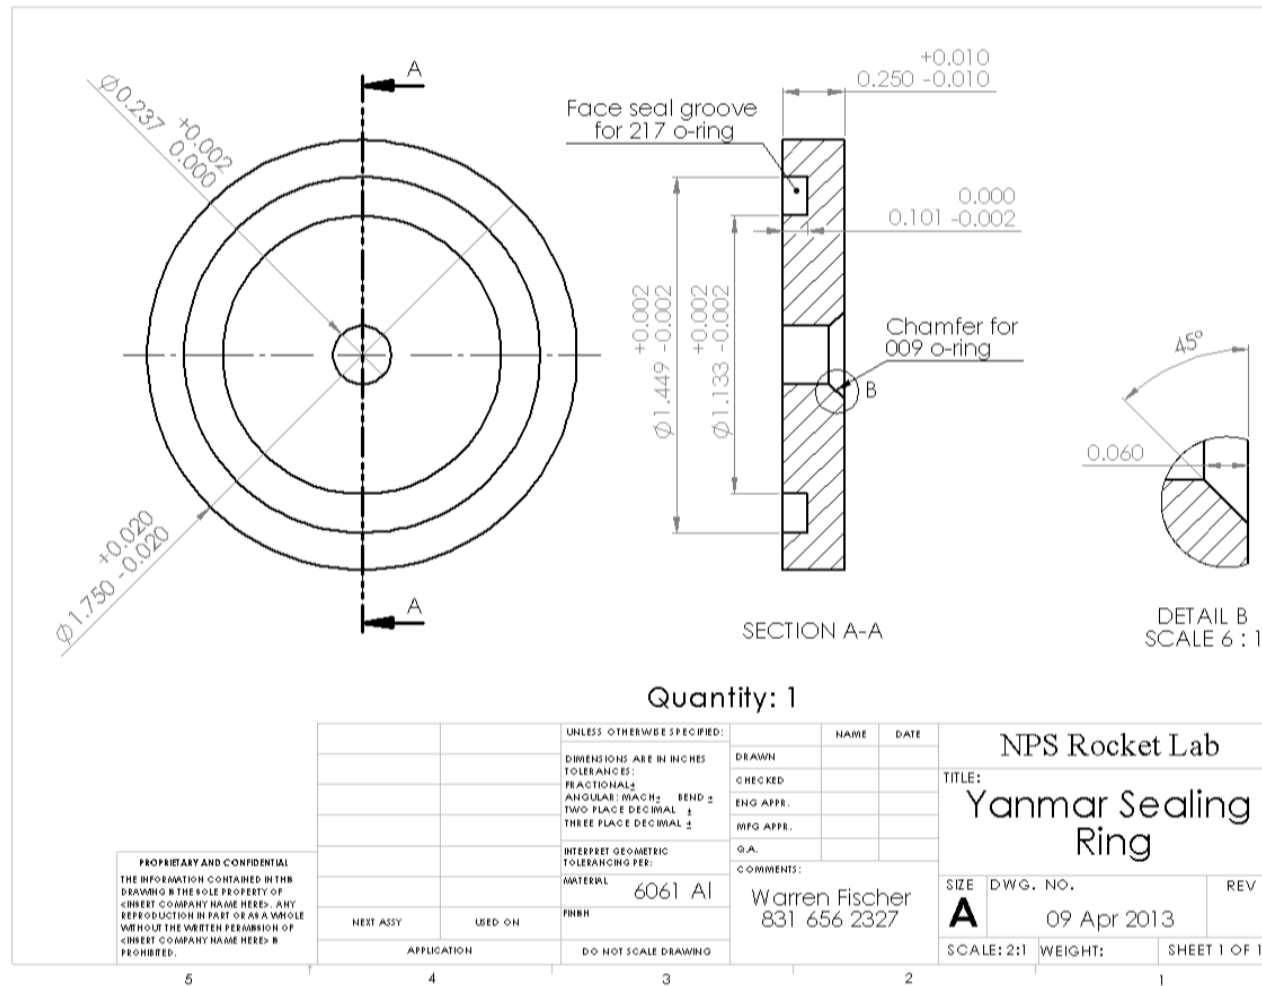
Yanmar Injector Adapter Sealing Ring Fabrication Drawing
